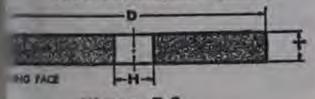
Type 1 — Straight Wheel I grinding wheel having a diameter, thickness and hole.
